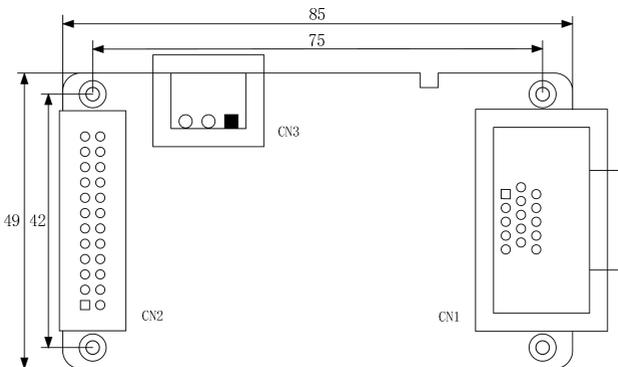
Smile3000-PG-S appearance and dimensions (unit: mm)
